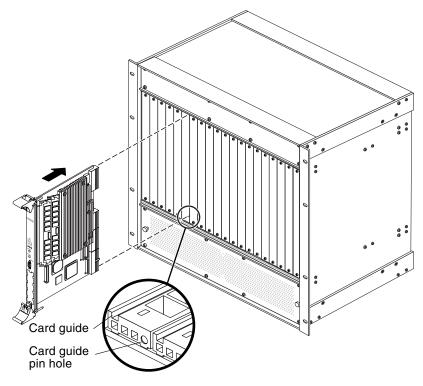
Installing a Netra CP2500 Board Into a cPSB Chassis Slot
